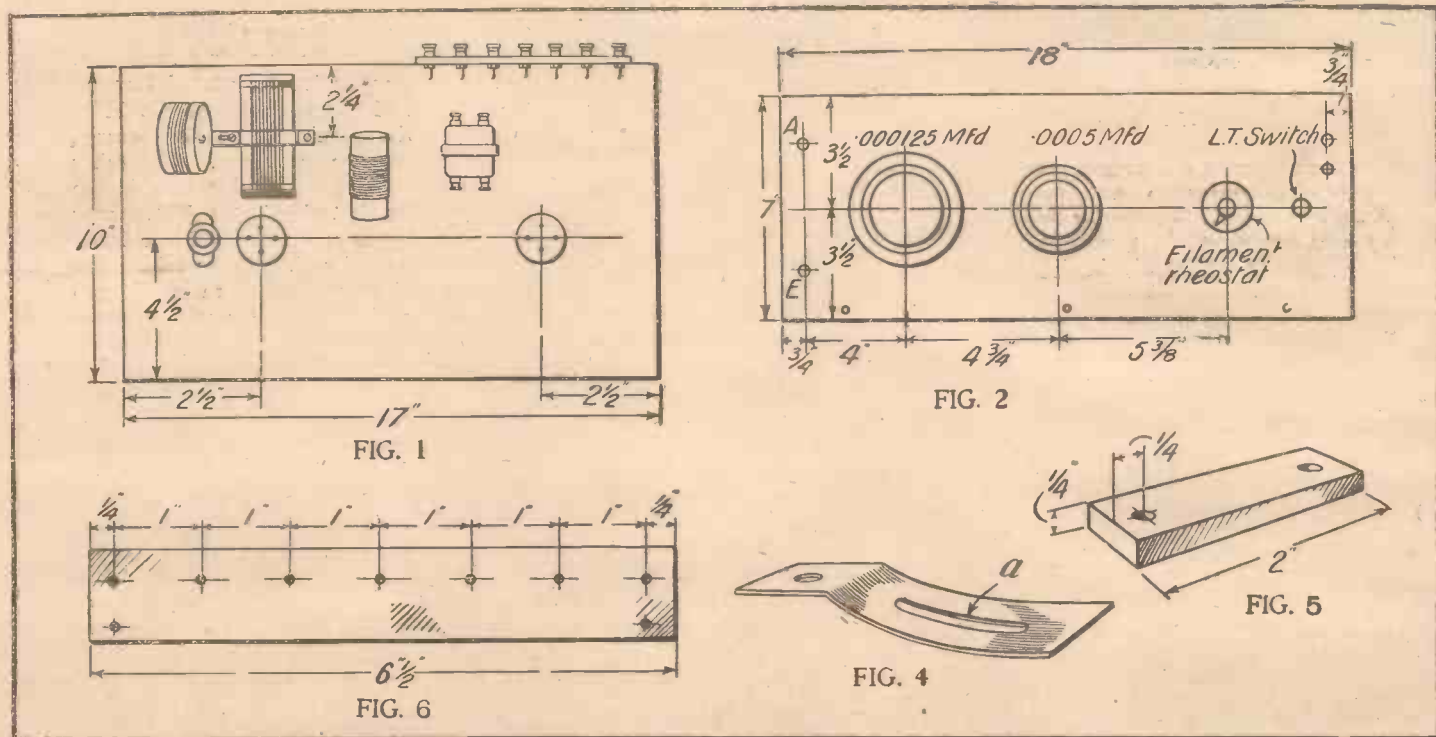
Layout of Baseboard. Fig. 2.—Layout of Panel. Fig. 4.—Support for Aerial Inductance. Fig. 5.—Clamp for Coil. Fig. 6.—Details of Terminal Strip.
